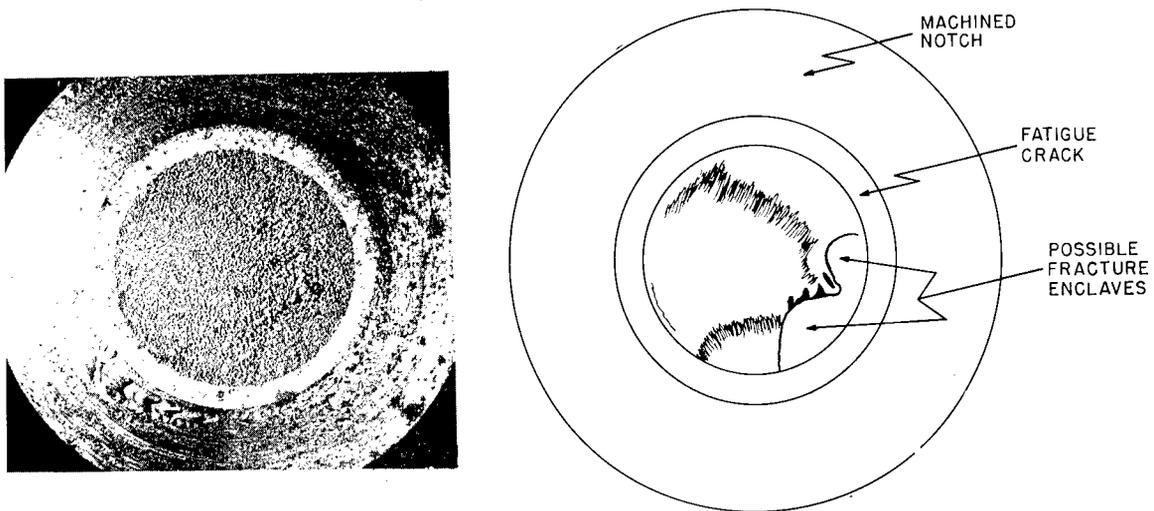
The brittle fracture for a fatigue-cracked 4340 steel specimen: (left) fully brittle fracture and (right) schematic representation of fracture details suggesting oscillatory crack development
